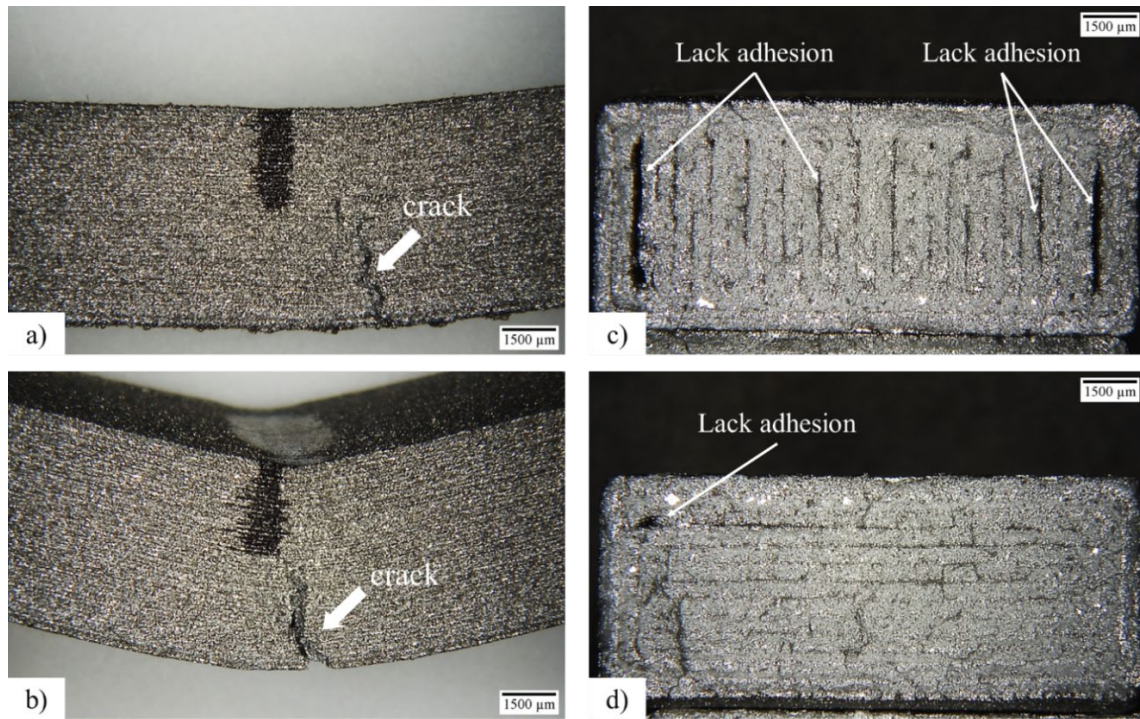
Bended specimens: a) XY-0 b) XY-90 and fracture surfaces of c) ZX-0 d) ZX-90
